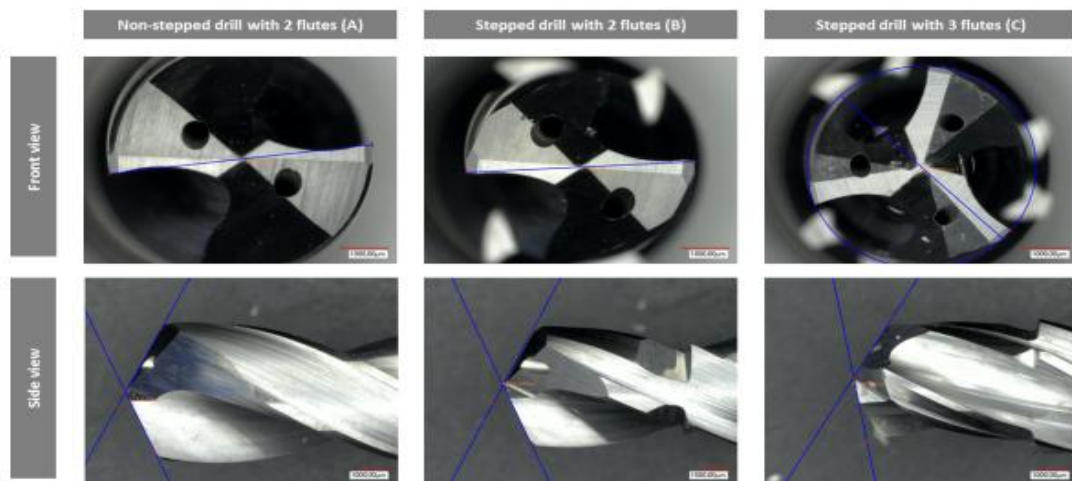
Front and side views of the used tools. Geometries of tool.
